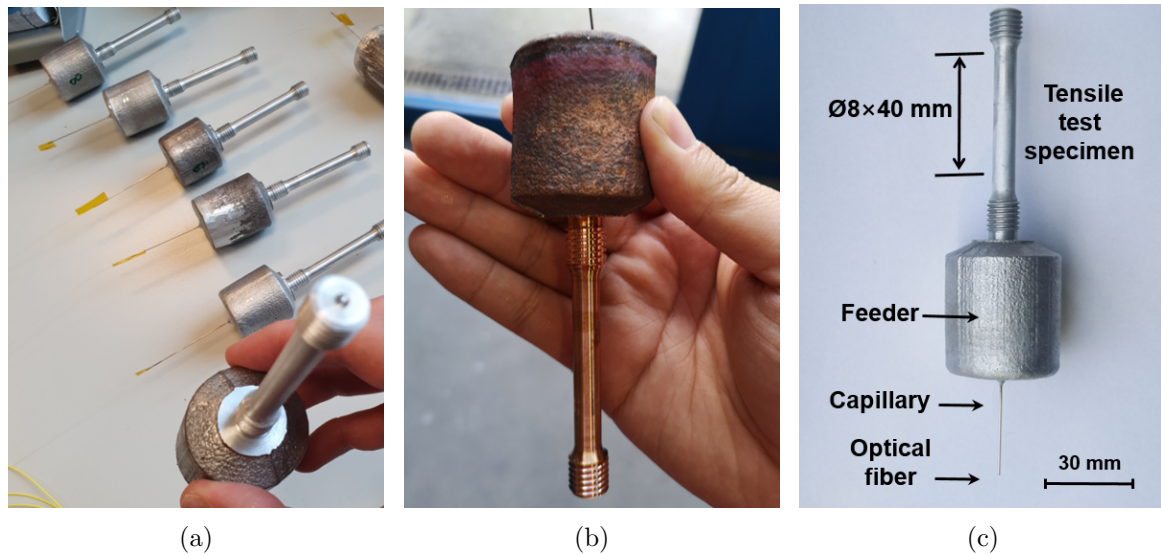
Pictures of (a) aluminum tensile test specimens, (b) a copper tensile test specimen. (b) Specification of a tensile test specimen.
